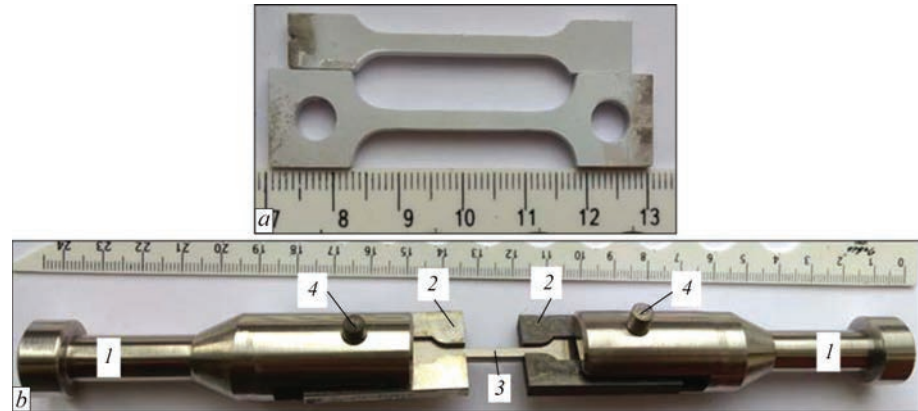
Appearance of the optimized flat proportional specimen compared to the specimen of a conventional shape (a) and manufactured assembly of a specialized fixture for the test MP-3G machine (b). Designations: 1 — main gripper; 2 — intermediate gripper-adapters; 3 — specimen for mechanical testing; 4 — pin of 6 mm diameter
